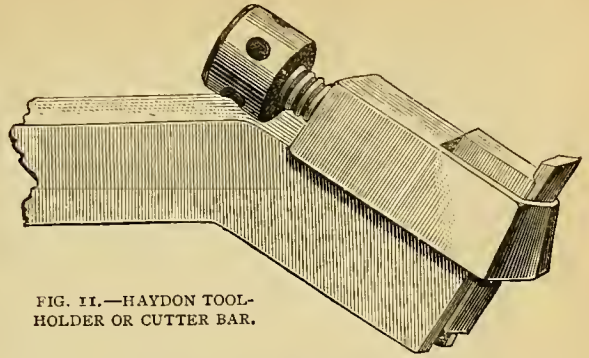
HAYDON TOOL-HOLDER OR CUTTER BAR.
